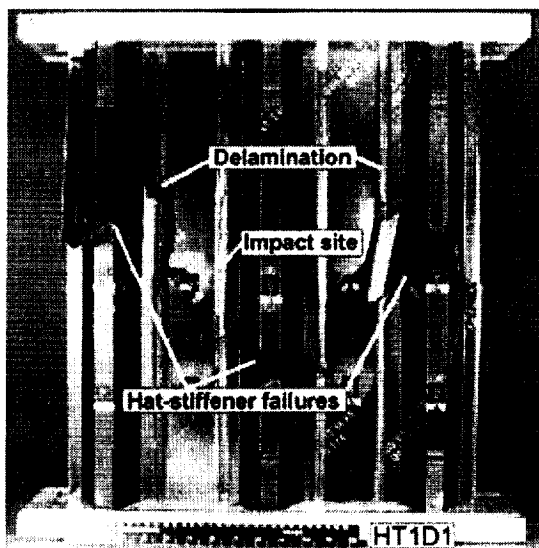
Failure location on stiffener side of Specimen HT1D1.
